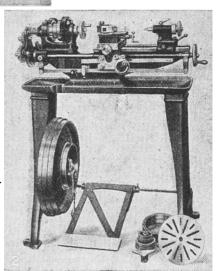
Drummond back-geared lathe, with the principal parts explained.
